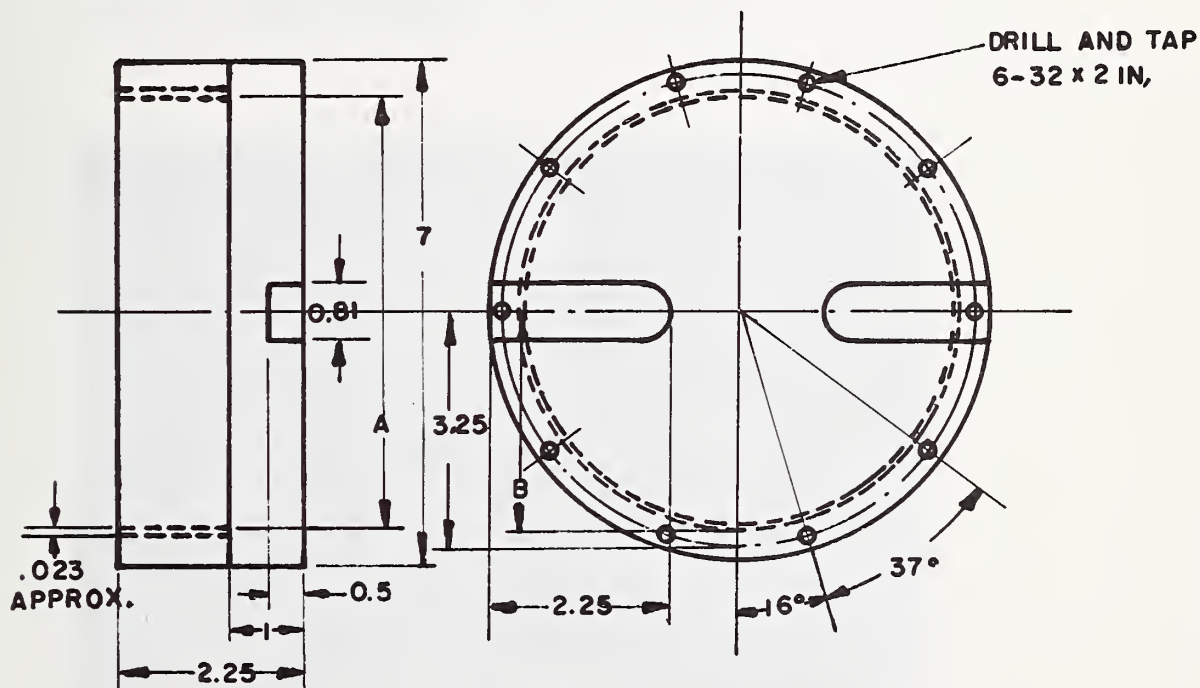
END FIXTURES FOR ALL-COMPOSITE TORSION SPECIMENS.
